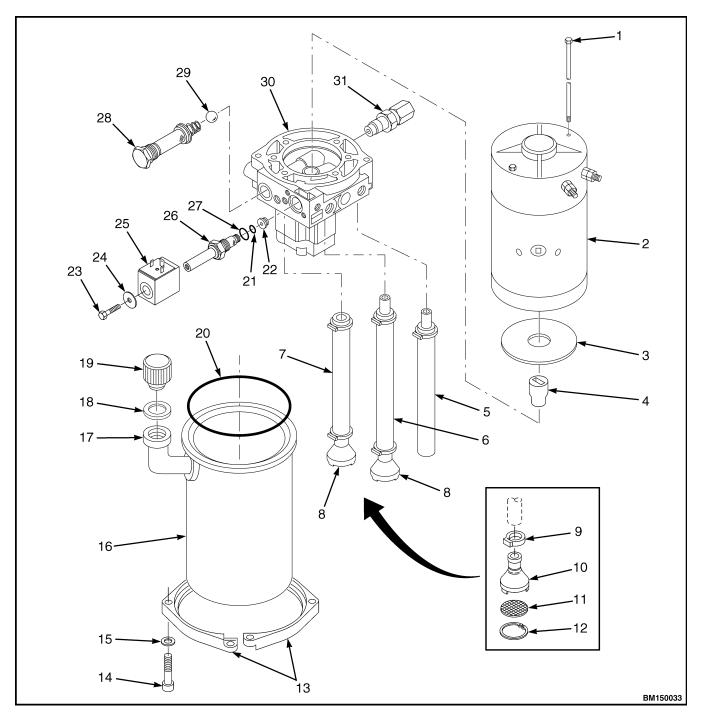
Lift Pump and Motor Assembly for B80Z, B80Z^{AC}, C80Z, C80Z^{AC}, W65Z, and W80Z Lift Trucks
